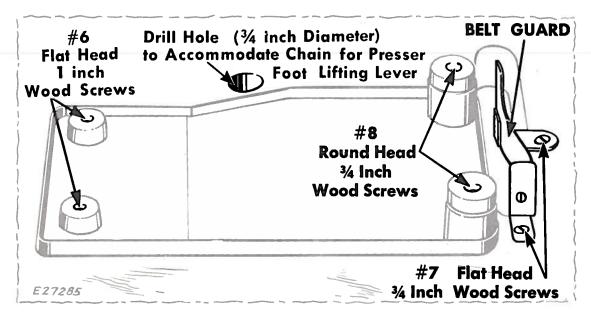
Machine Base on Table, Showing Position and Drill Sizes of Holes Required for Installation
